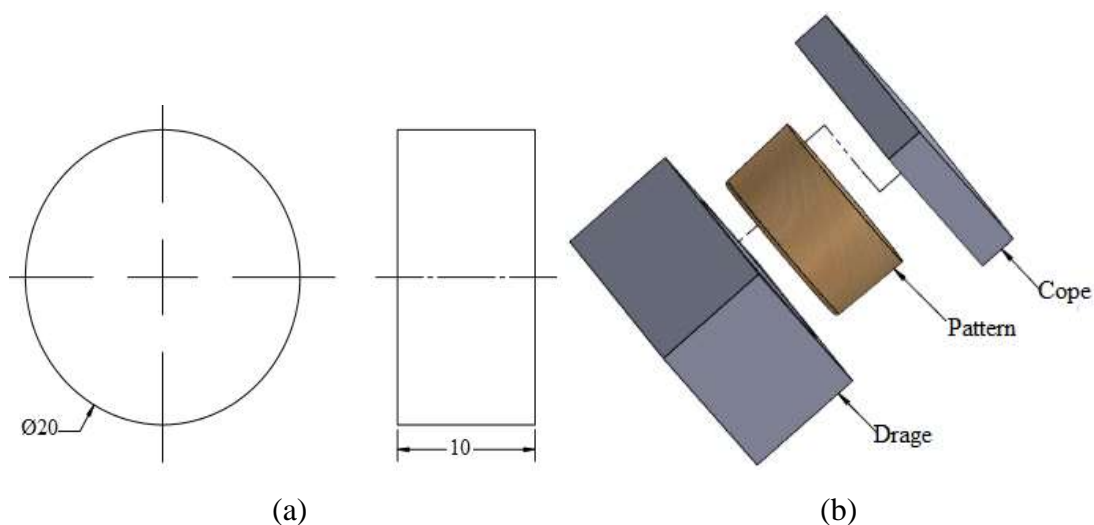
Hardness test specimen model: (a) Modeled hardness test sample pattern dimension in mm, (b) Mold preparation explode.
